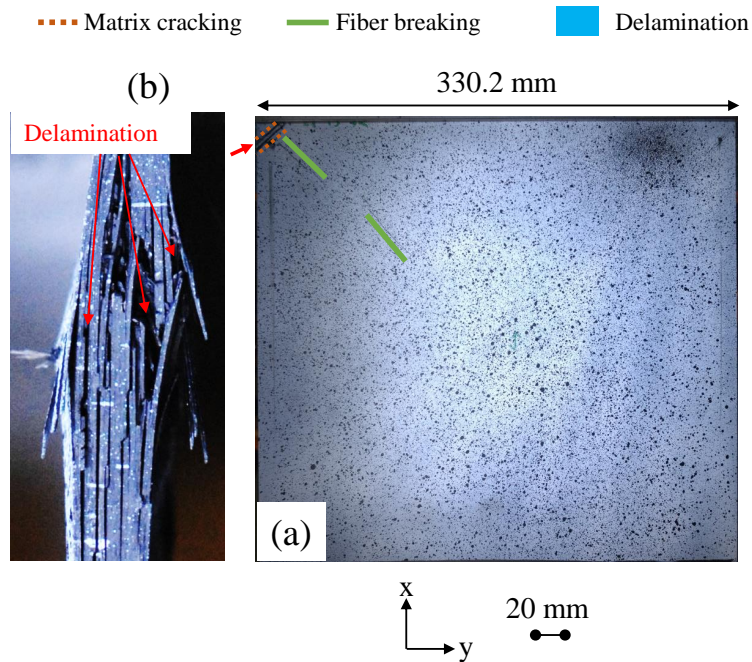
Surface inspections of the CAI-induced damage of an L1-L-24 sample: (a) non-impacted surface, and (b) left side view.
